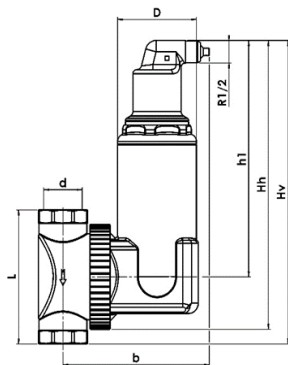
Dimensions 1 1/4", 1 1/2" and 2" female thread
